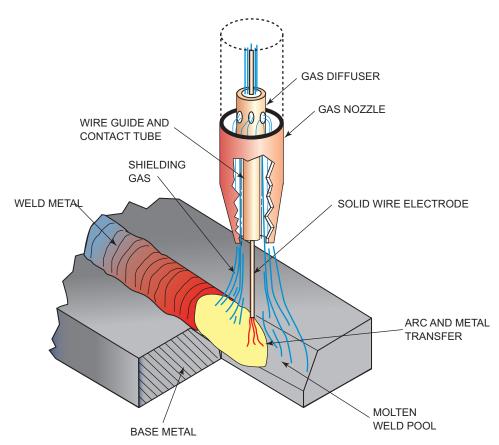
Gas shielded metal arc welding (GMAW).
